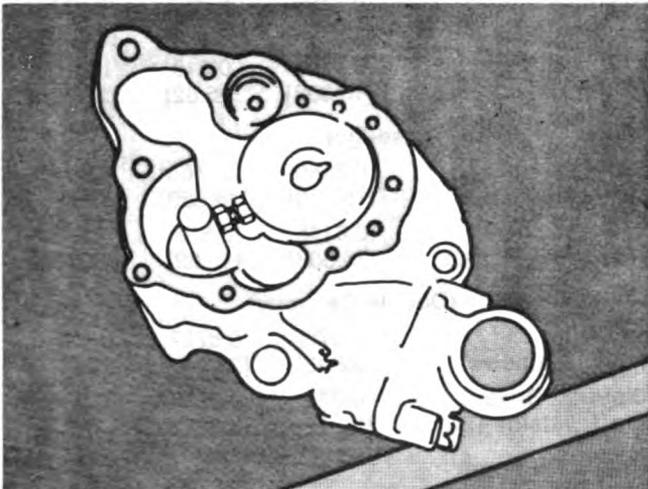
Install The Guide Bushing Into The Gear Pocket.
